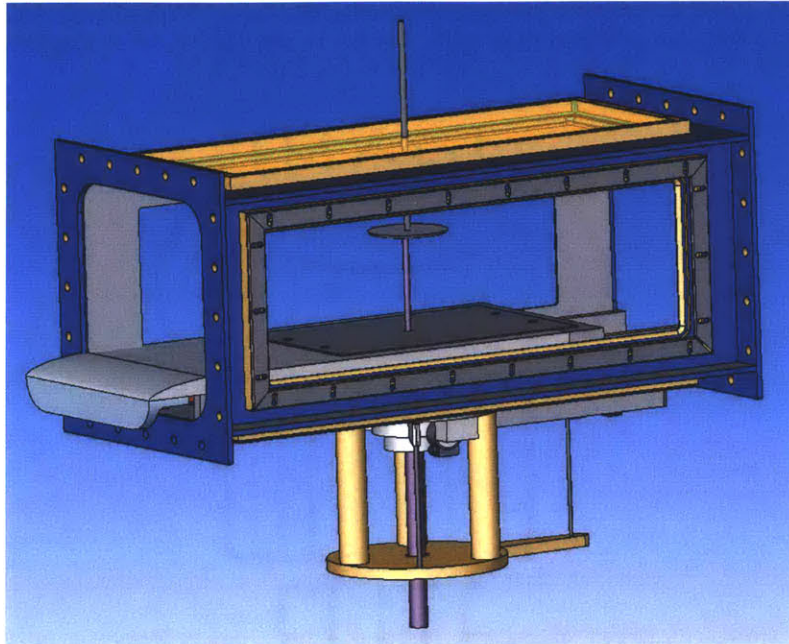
3D solid model assembly of cylinder experiment setup
